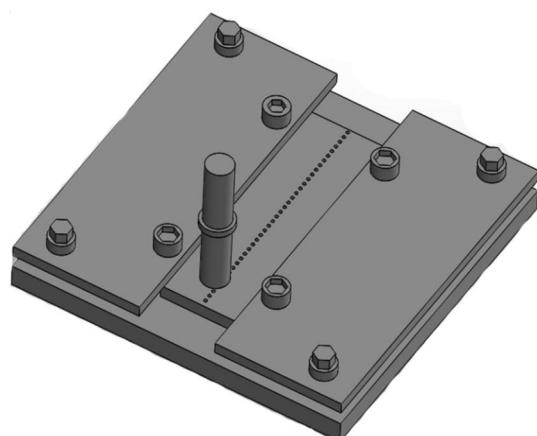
Schematic of Al 2024 sheet with given dimensional and holes
